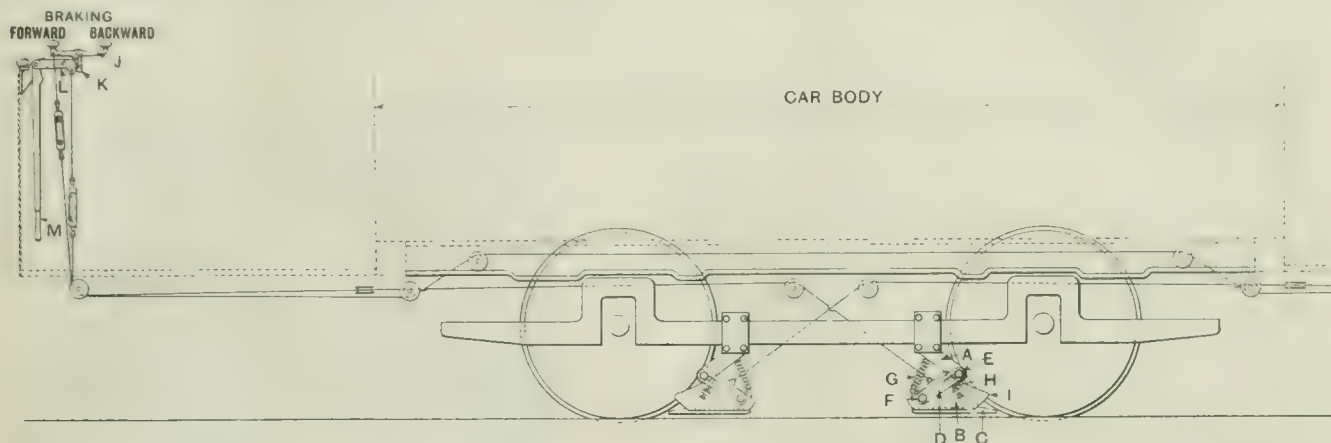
DIAGRAM SHOWING ARRANGEMENT OF GROOVE SKID BRAKE.
